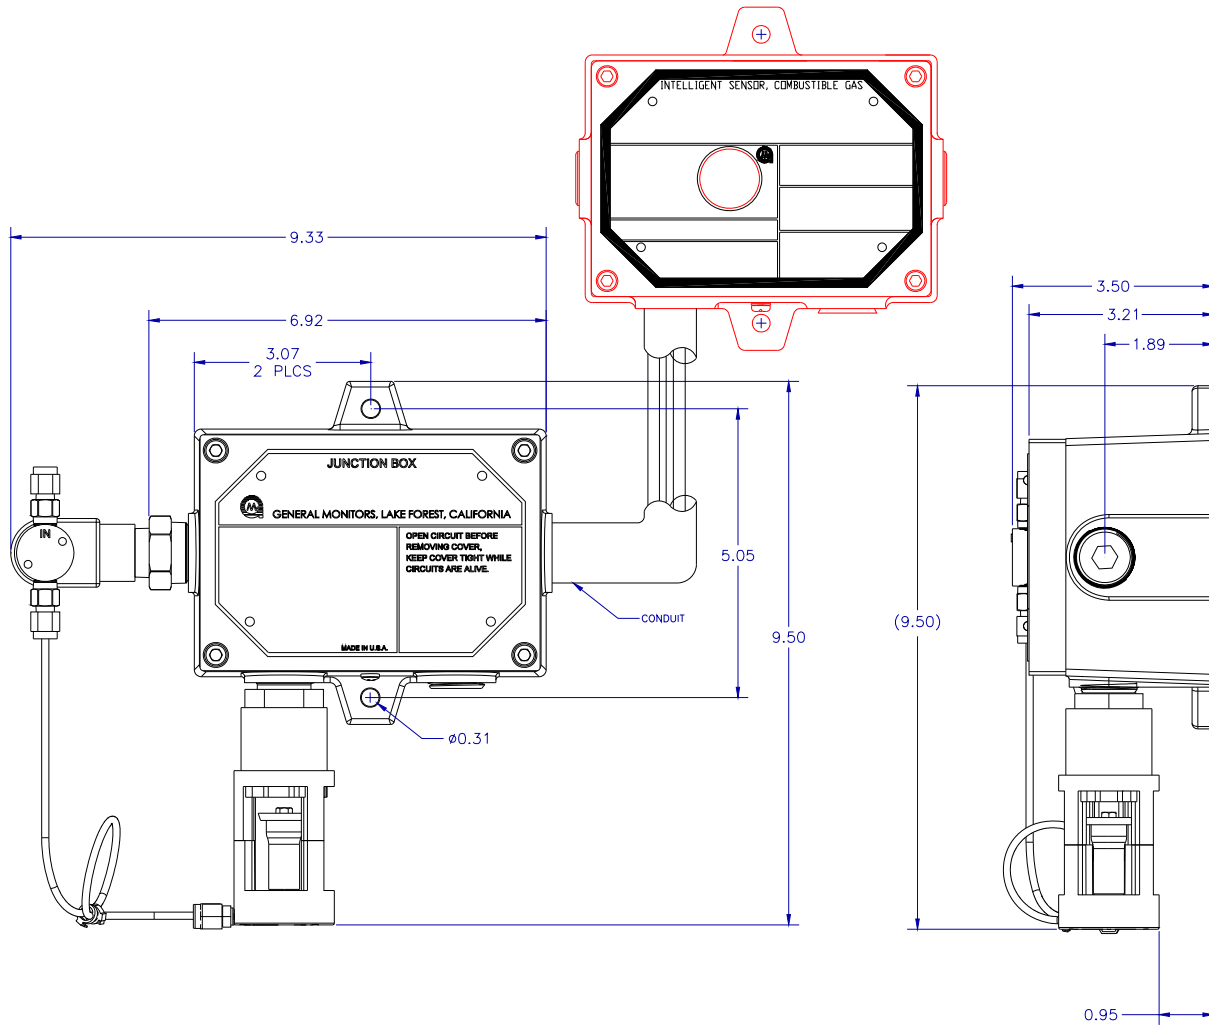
RGC (80153-1) with S400CH Dimensions and Outline Drawing
